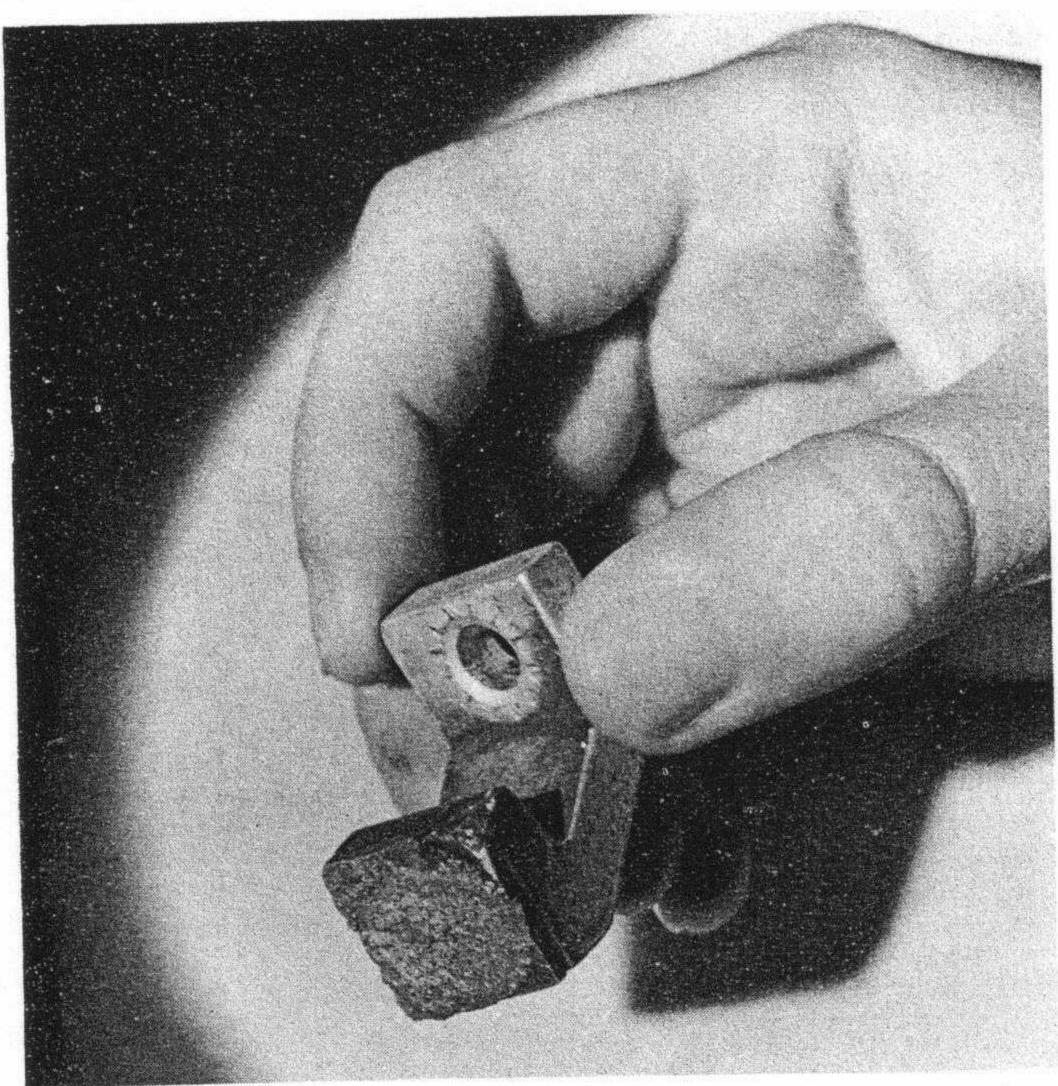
Silver Contact Face and One Corner of this Entire Unit Have Been Severely Burned While Interrupting an Excessive Current. However, Ample Silver Remains to Permit Carefully Removing the Burned Surface to Restore the Smooth and True Contact Shape, so that the Contact Can Be Used Again
